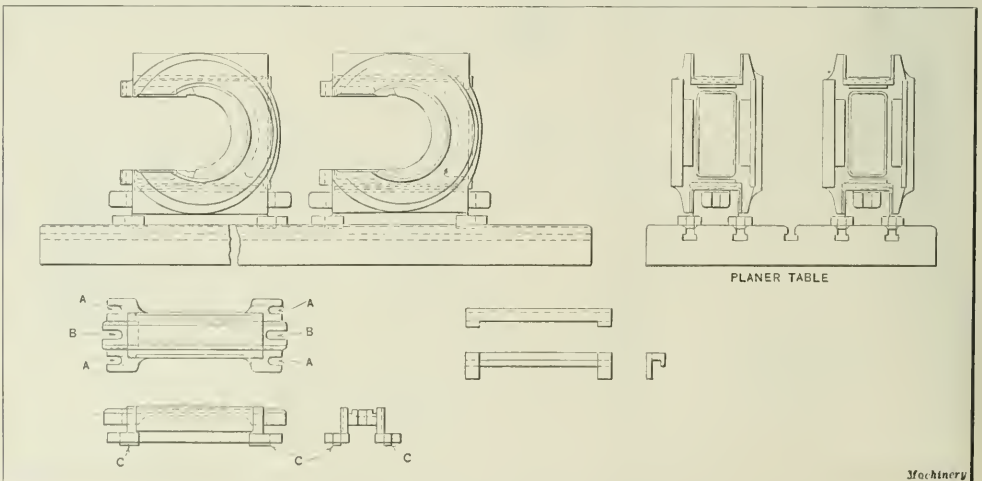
Multiple Fixture for planing Locomotive Driving-boxes
